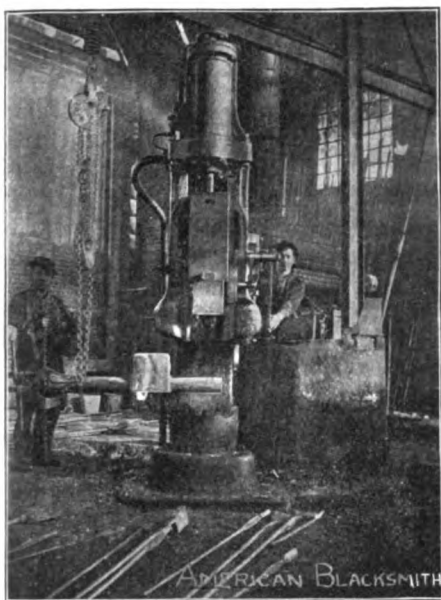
HAMMER FOR MAKING CRANKS AND KING PINS ON STEAM ROLLERS.
